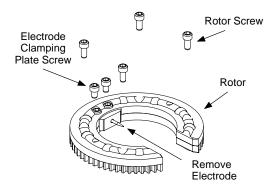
Removing the Rotor and Electrode Clamping Plate Screws
